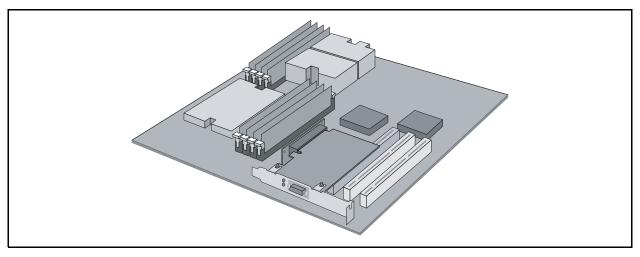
Assembled PCIe Host Channel Adapter with Riser
